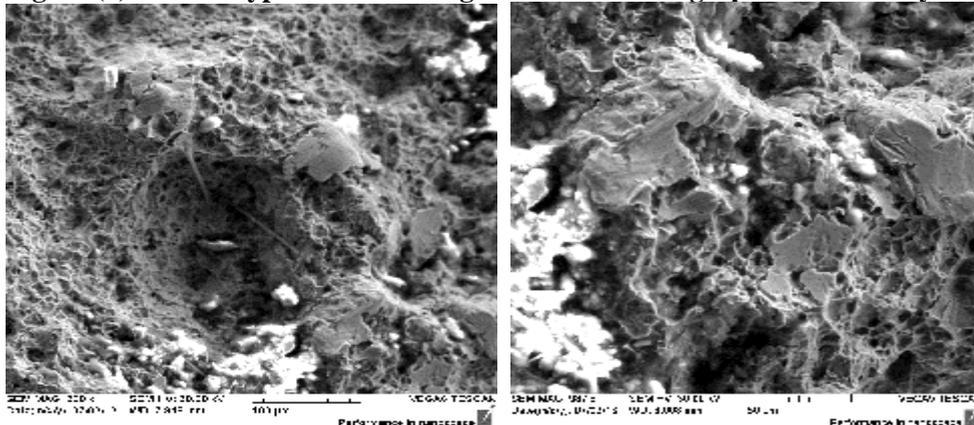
show micrograph of fracture surface morphology of the specimen surfaces of the pre corrosion-fatigue test for steel alloy CK35.
